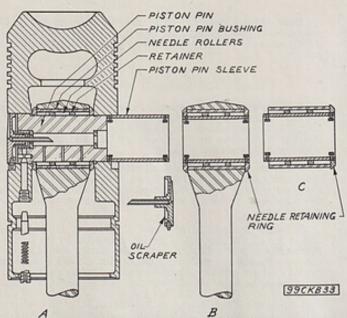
Disassembling Needle Roller Piston Pin Bearing
